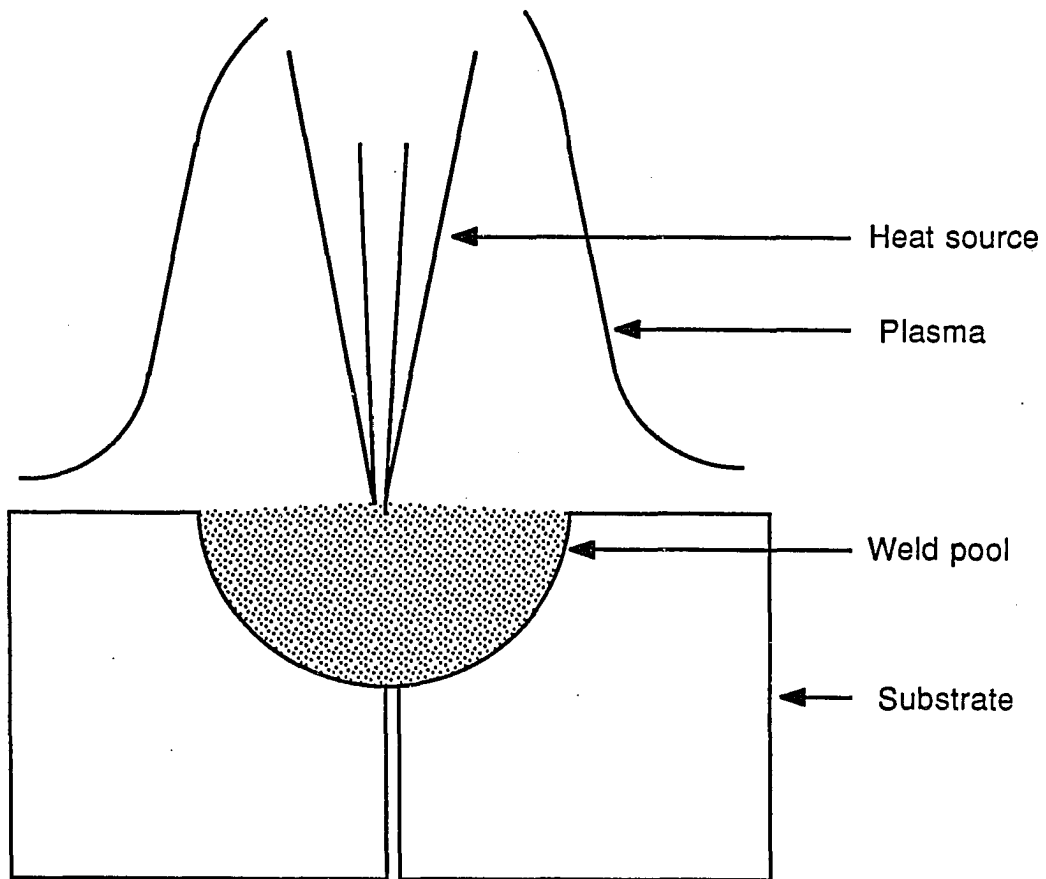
Schematic of the important physical processes occurring during welding.
